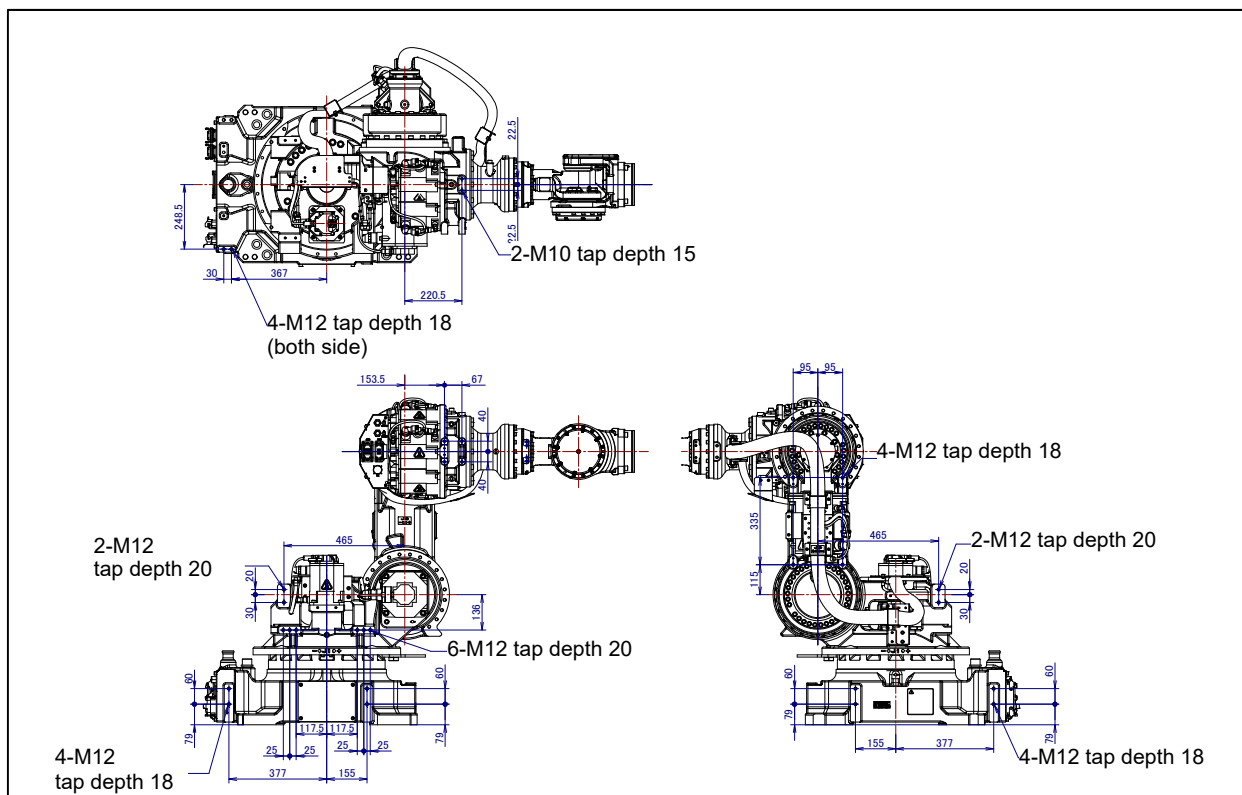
(i) Equipment mounting faces (R-2000iB/170CF)
